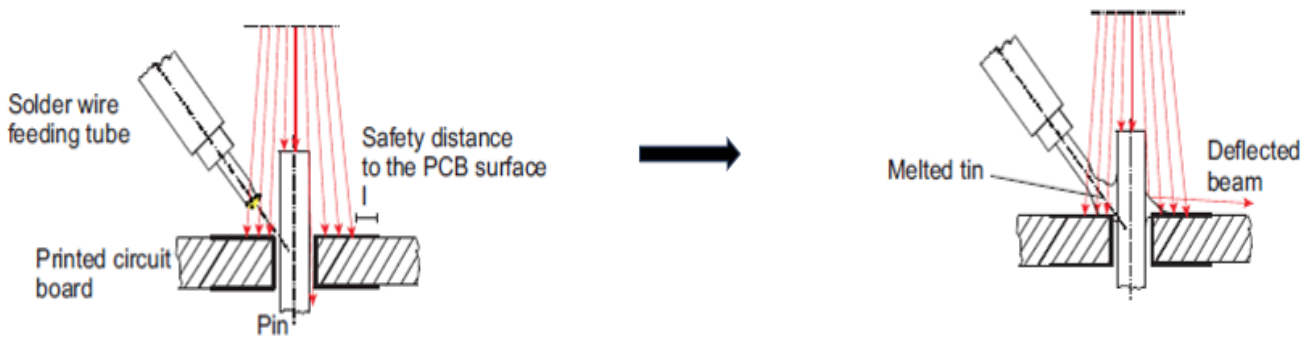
Process sequence of the laser soldering with solder wire feeding with flux core [77].
